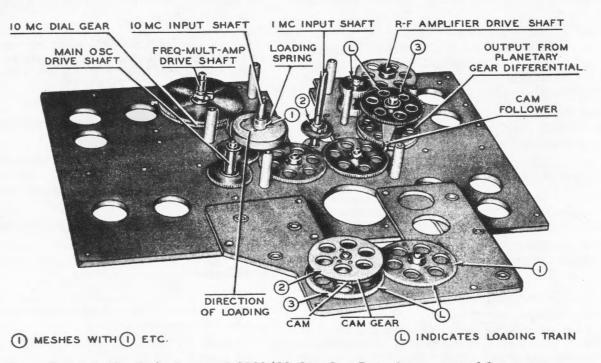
Radio Receiver R-278B/GR, Rear Gear Train, Arrangement of Gears
